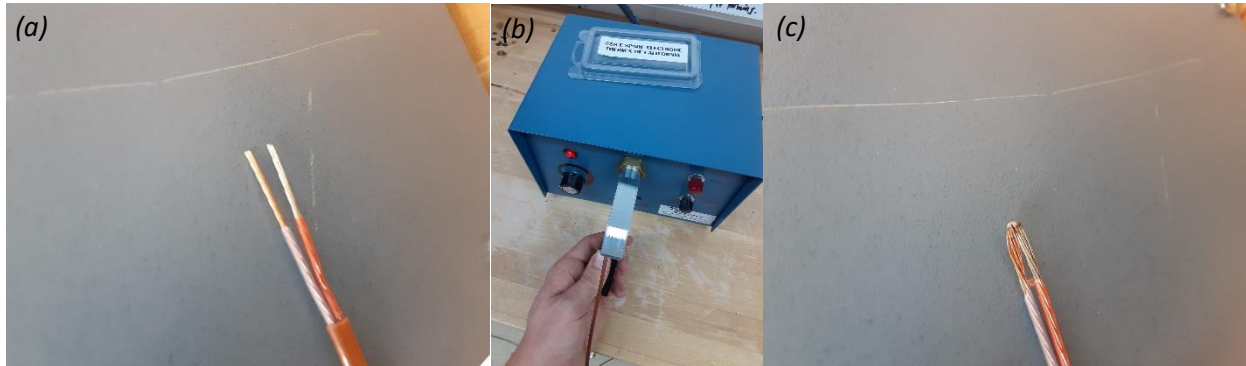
a) Thermocouples before welding, b) thermocouple welder, c) and welded thermocouple
